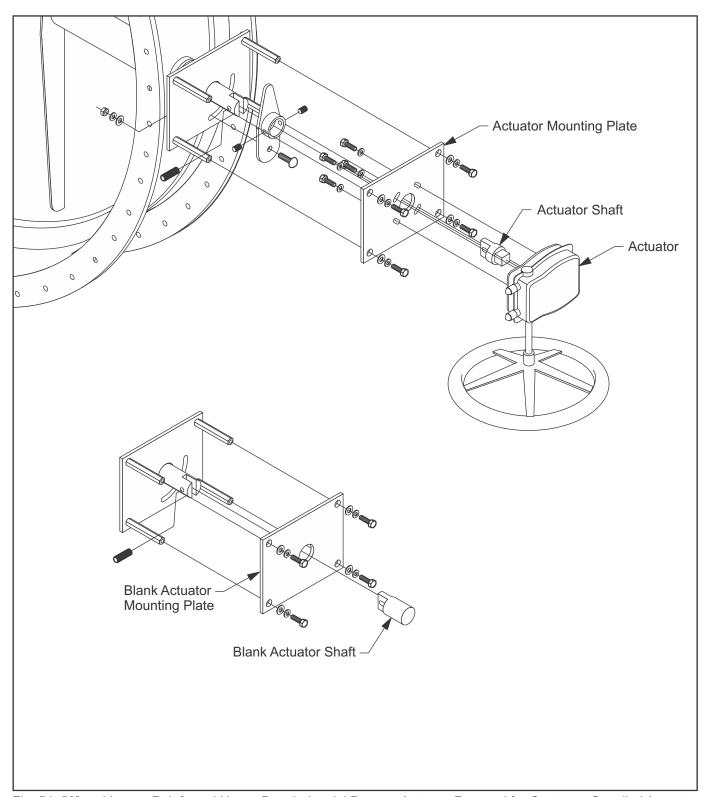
50" and Larger Reinforced Heavy Duty Industrial Damper Actuator Removal for Customer Supplied Actuator.
